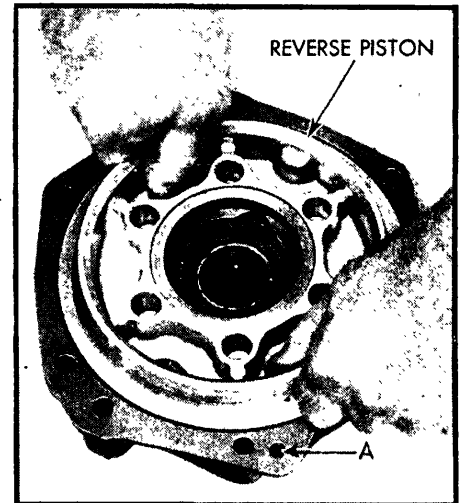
Removing reverse piston. If piston cannot be removed by hand, apply air pressure at hole "A". 1951-52
